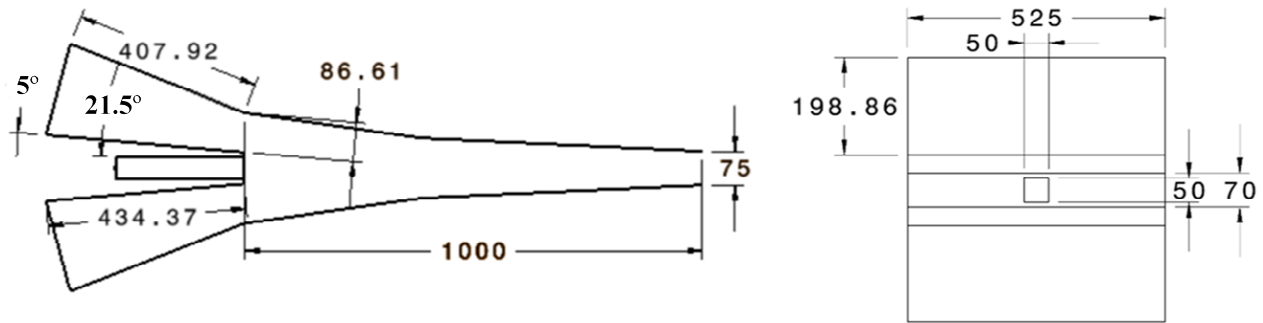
Detailed drawing of nozzle 4 indicating important dimensions. Units are μm where no units are shown.
